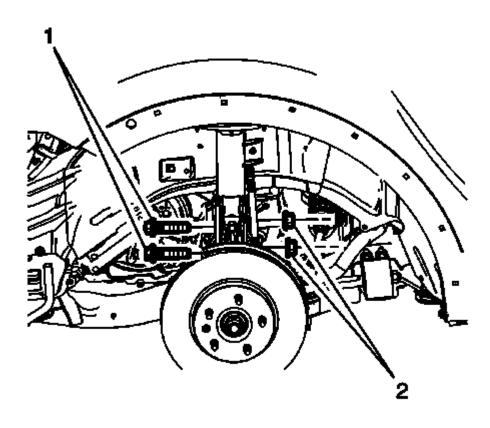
Secondary Air Injection Bolts And Nuts Courtesy of GENERAL MOTORS COMPANY
